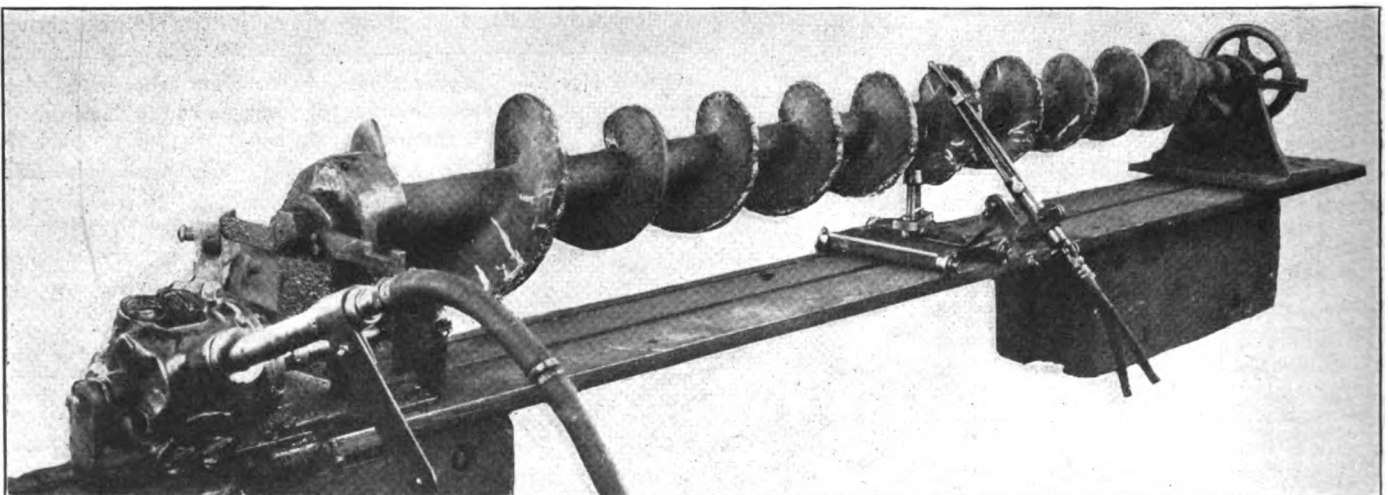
Device for cutting off the worn part of Duplex stoker conveyor screws
